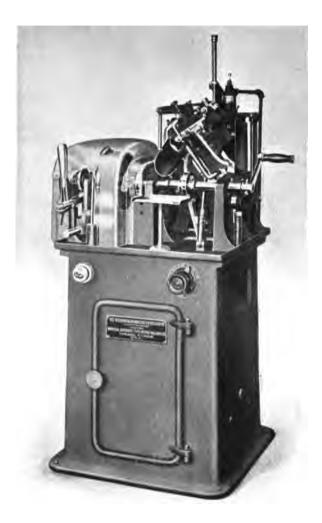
Nuernberger-Rettig typecaster. To face page 307.]
